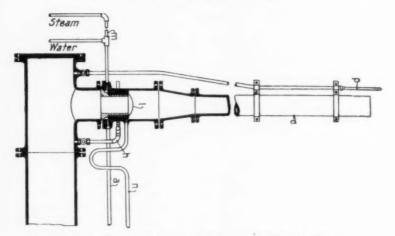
WEFER SAFETY VALVE FOR COKE OVEN GAS MAINS
